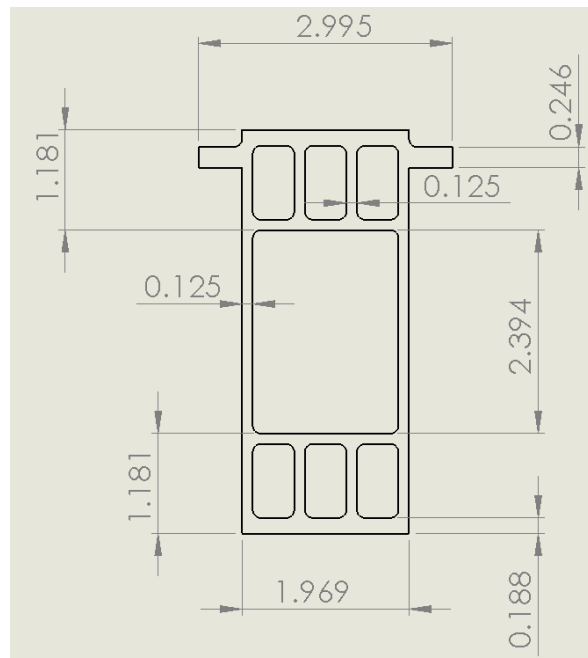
A PAD core drawing with all dimensions labeled in inches.
